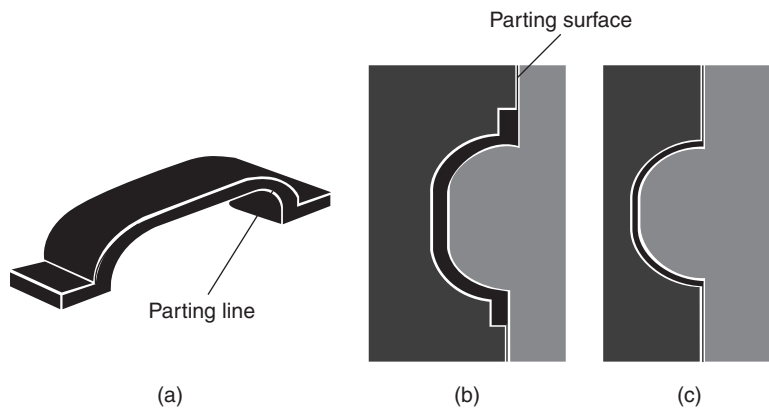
(b) Practicable and impracticable choice of parting surface.
